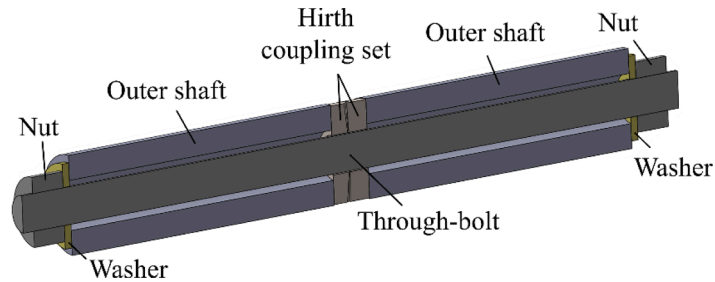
Test rotor assembly with Hirth coupling [19].
